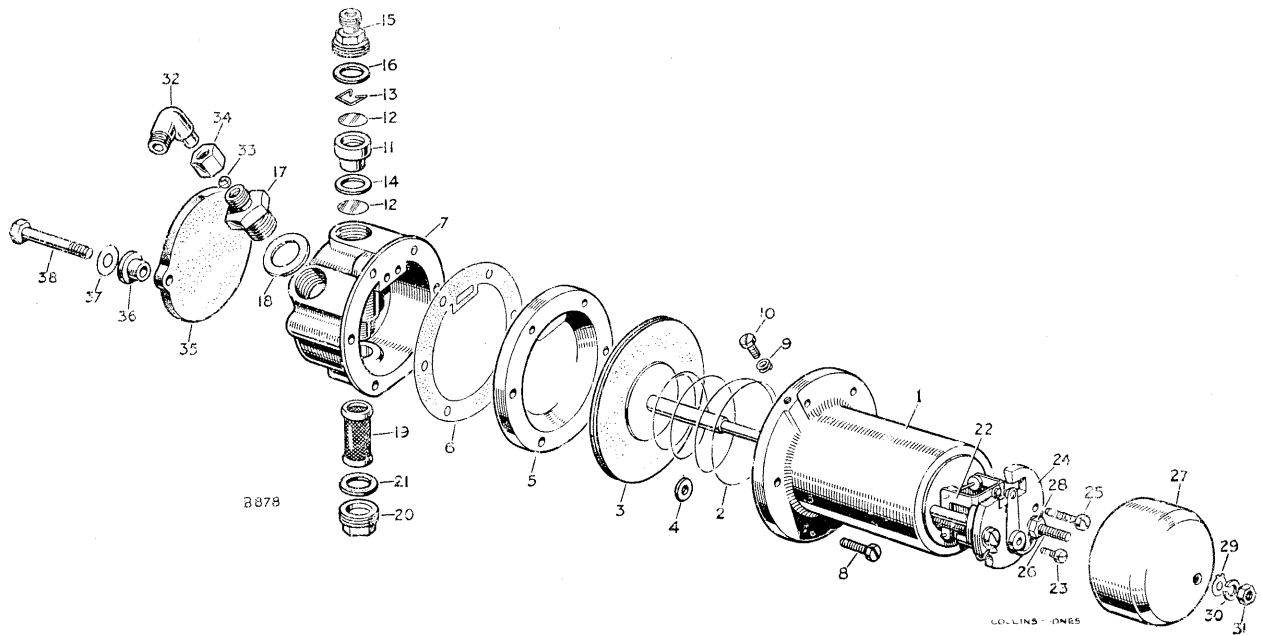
Exploded view of fuel pump, 2 litre Petrol
